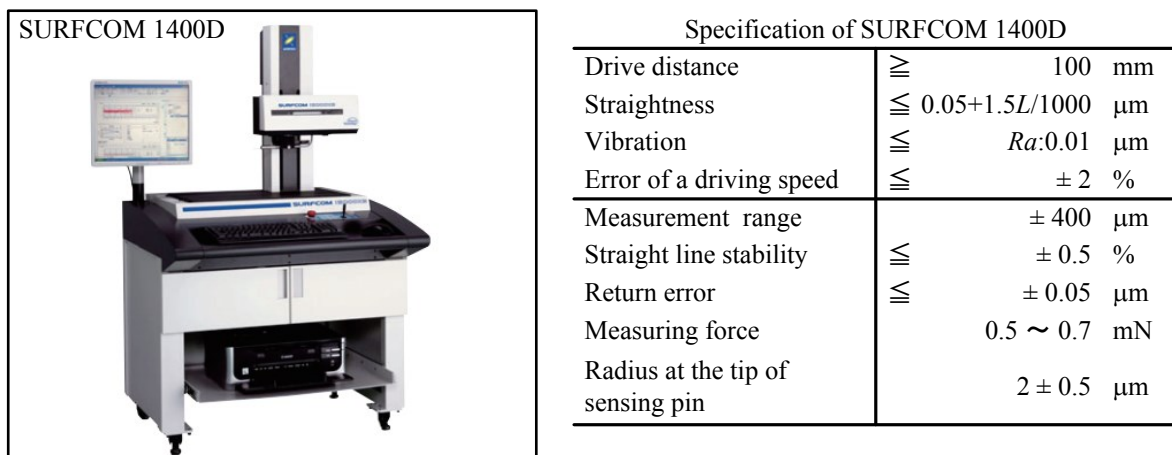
Photograph of surface roughness measurement machine (SURFCOM 1400D).
